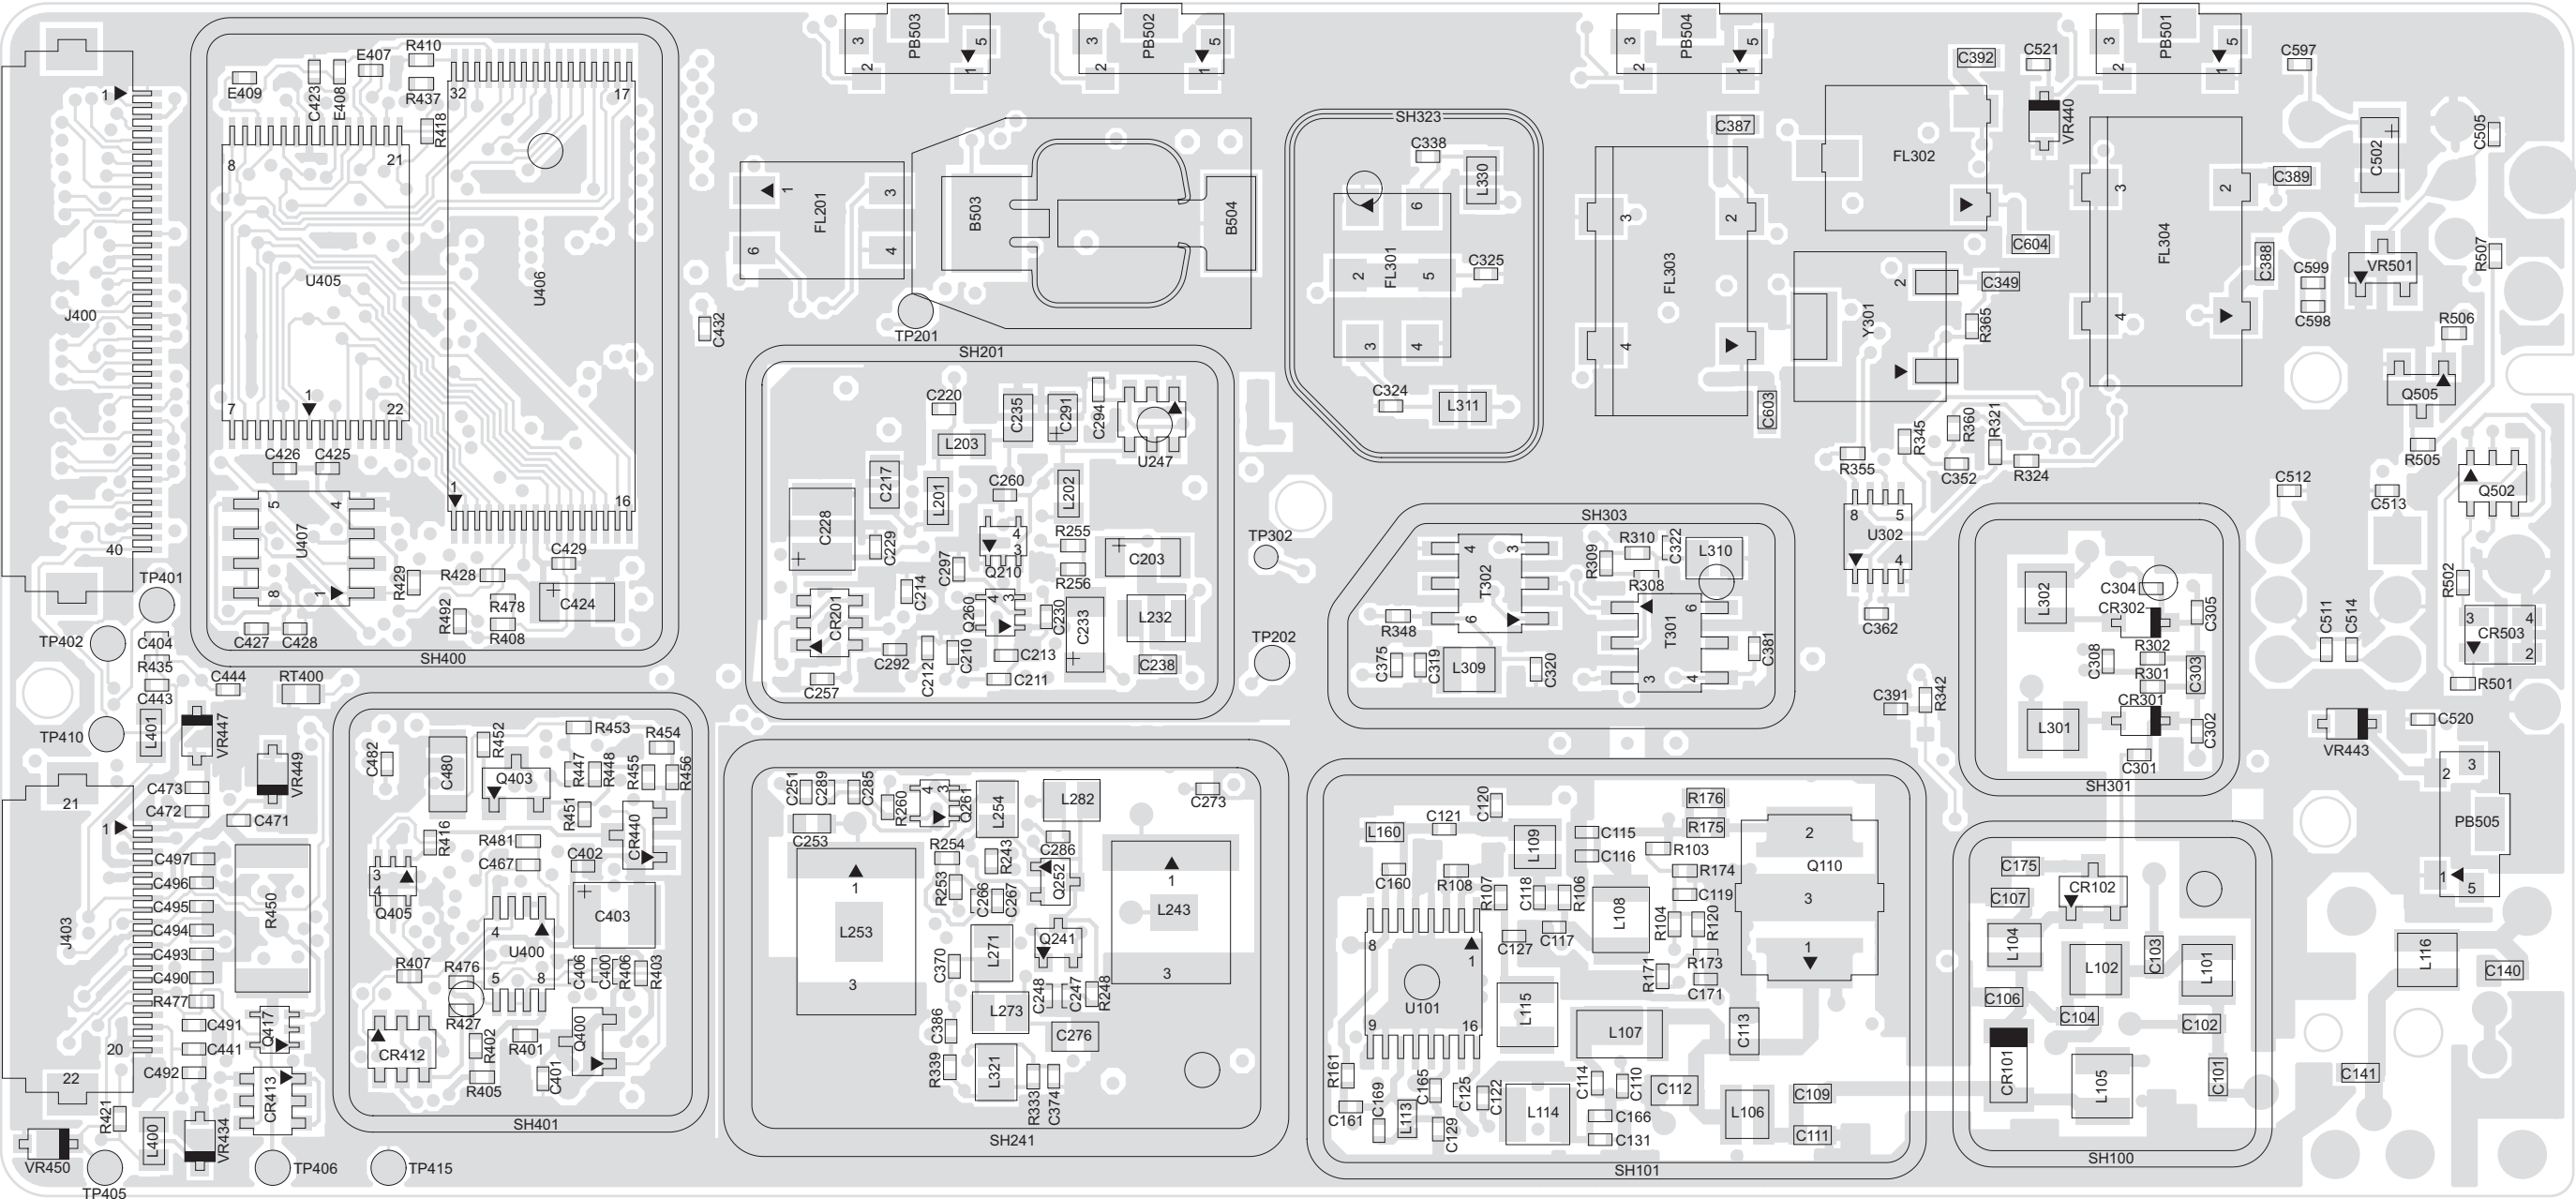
UHF (403–470 MHz) Main Board Top Side: PCB No. 8415234H09
